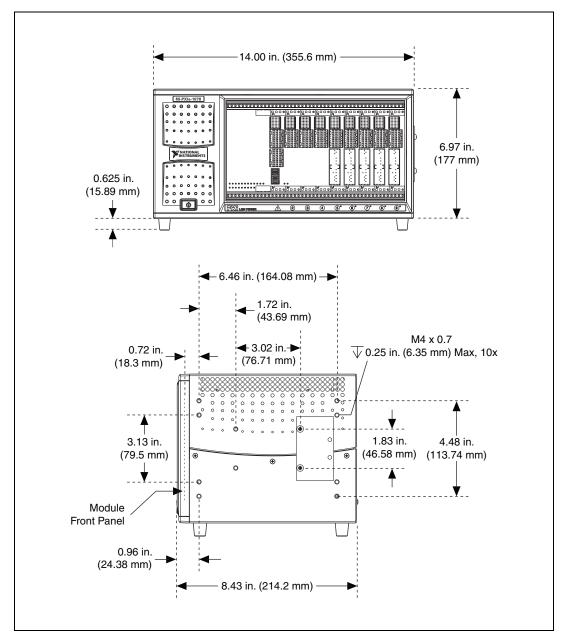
NI PXIe-1078 Chassis Dimensions (Front and Side)
